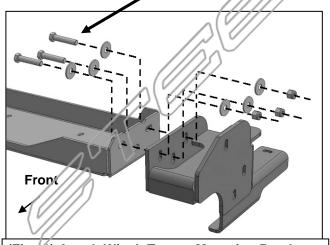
Reuse factory bumper bracket hardware to attach driver/left Frame Bracket to threaded holes in end of frame for bumper bracket
